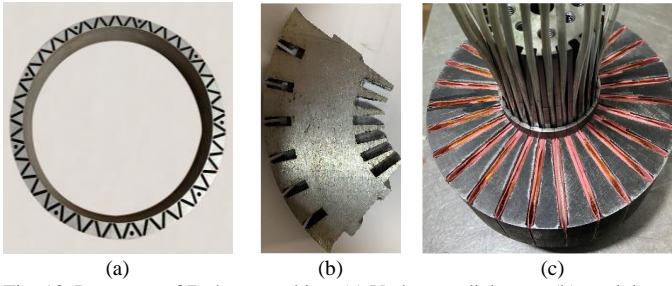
Prototype of 7-phase machine. (a) V-shape radial rotor. (b) modular SMC stator core. (c) stator with toroidal windings
